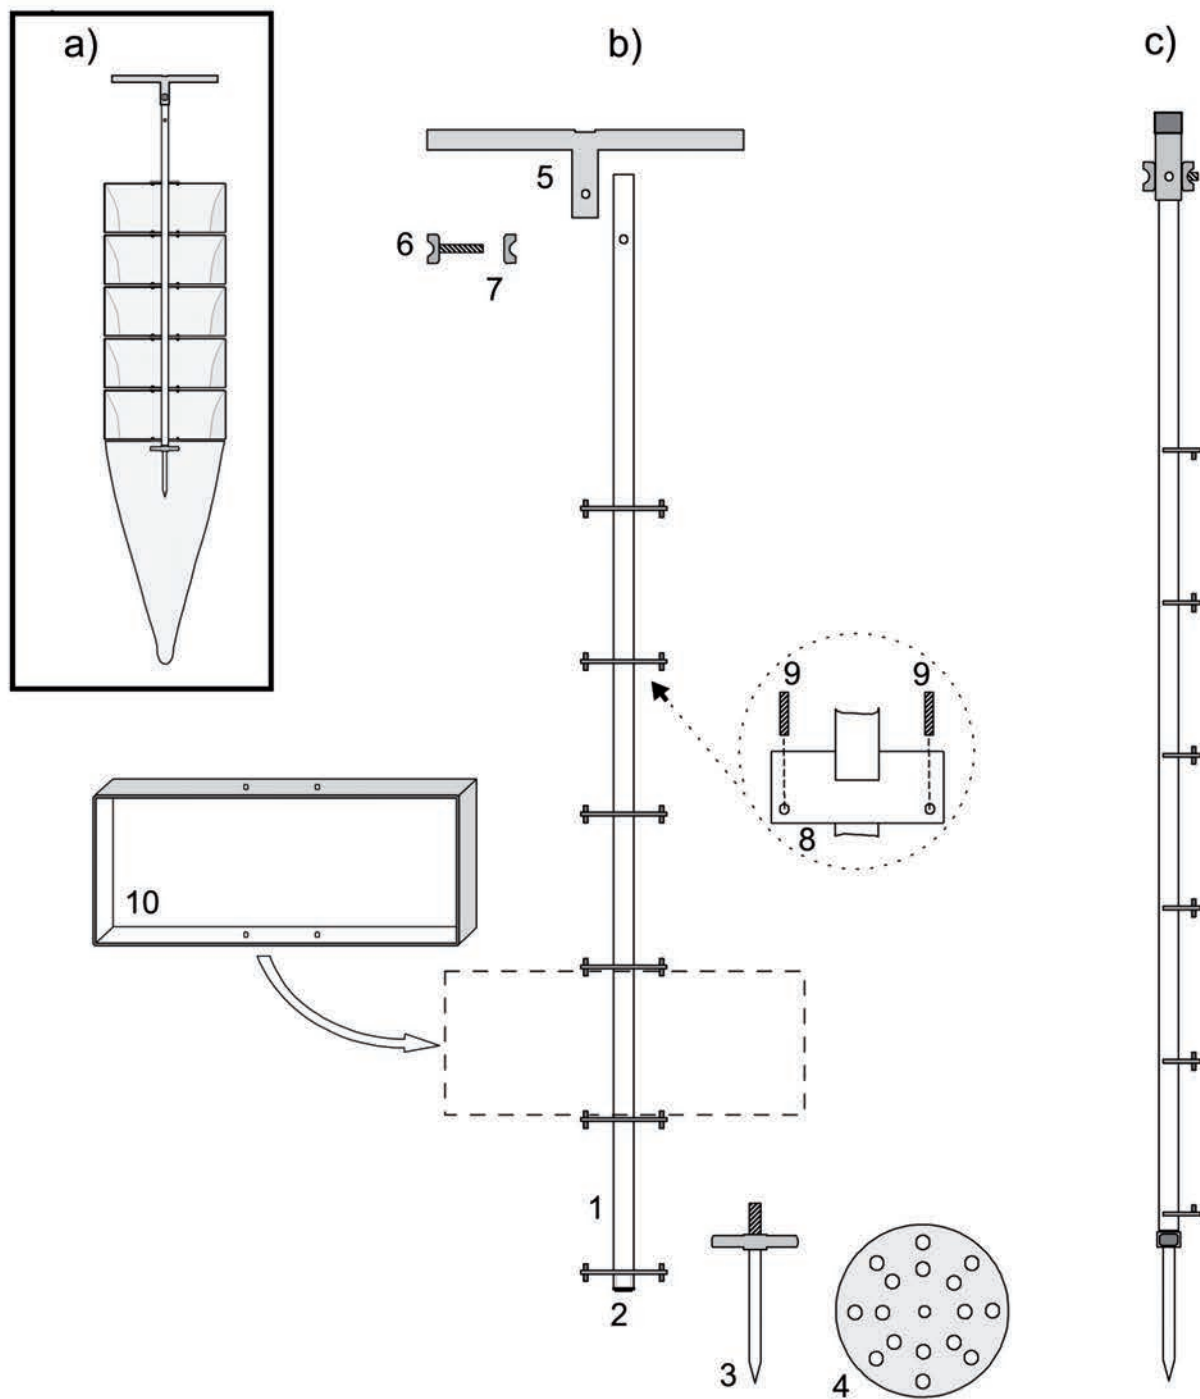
Stratifying drift sampler: a) apparatus in the assembled state, front view; b) sampler construction, back view: 1 – upright, 2 – bushing, 3 – "anchor", 4 – supporting disk, 5 – T-handle, 6 – butterfly bolt, 7 – butterfly nut, 8 – CTNH's perpendicular plate, 9 – CTNH's screw-pins, 10 – net mouth frame. A frontal drilled hole in the vertical part of the T-handle can be seen; c) apparatus without nets, side view. A lateral drilled hole in the T-handle's vertical part can be seen. See text for explanations.
